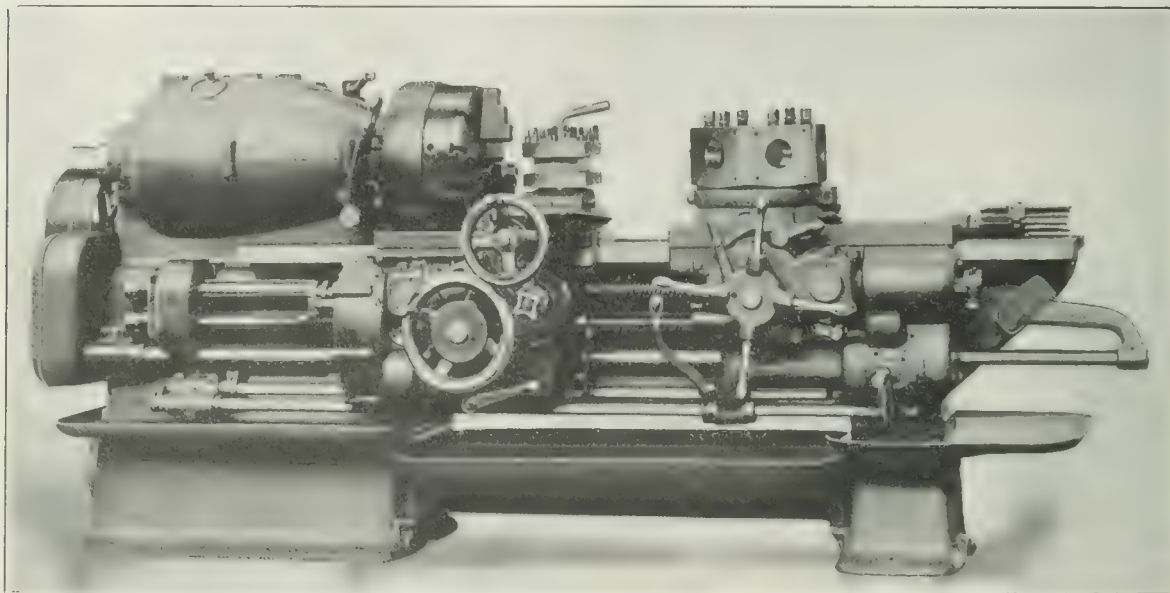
The Operating Side of the Libby 18-In. Turret Lathe Built by the International Machine Tool Company, Indianapolis, Ind.
